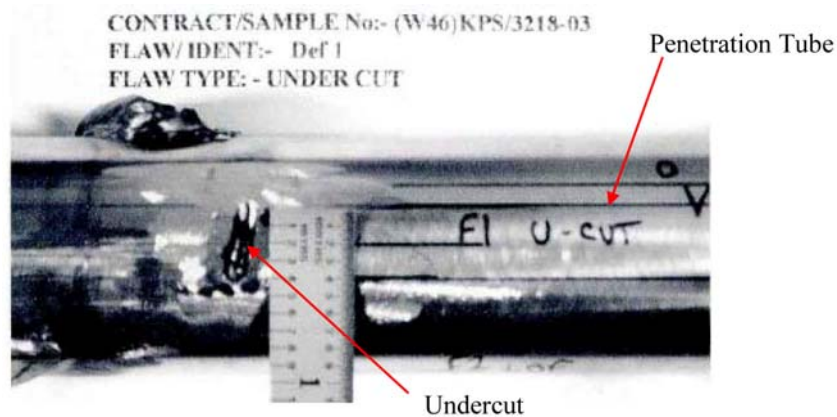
Example Weld Undercut Flaw as Used in Test Blocks 5.1–5.3
